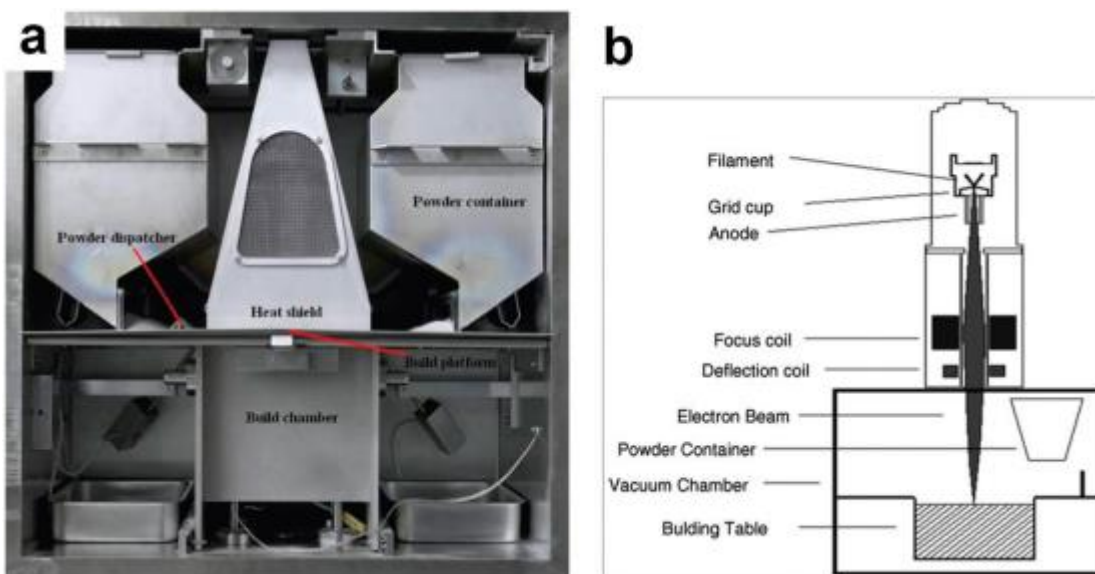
3 (a) Fusion on an EBM machine; (b) Scheme of an additive machine [42]
